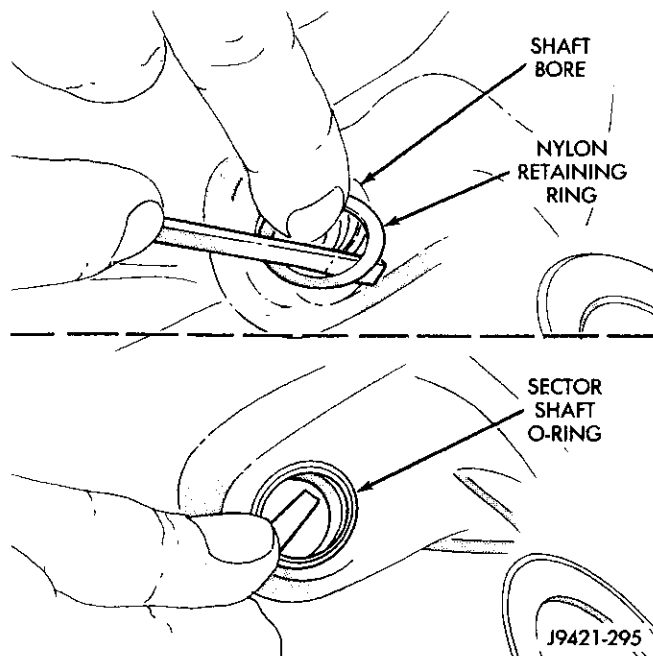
Removing Sector Shaft O-Ring And Retainer
